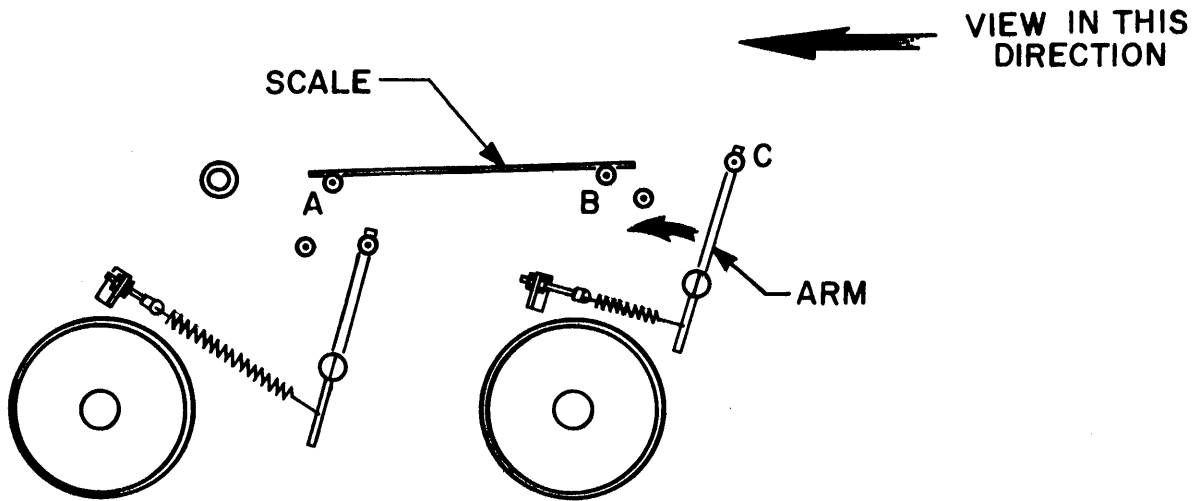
SUPPLY TENSION SPRING MEASUREMENT
